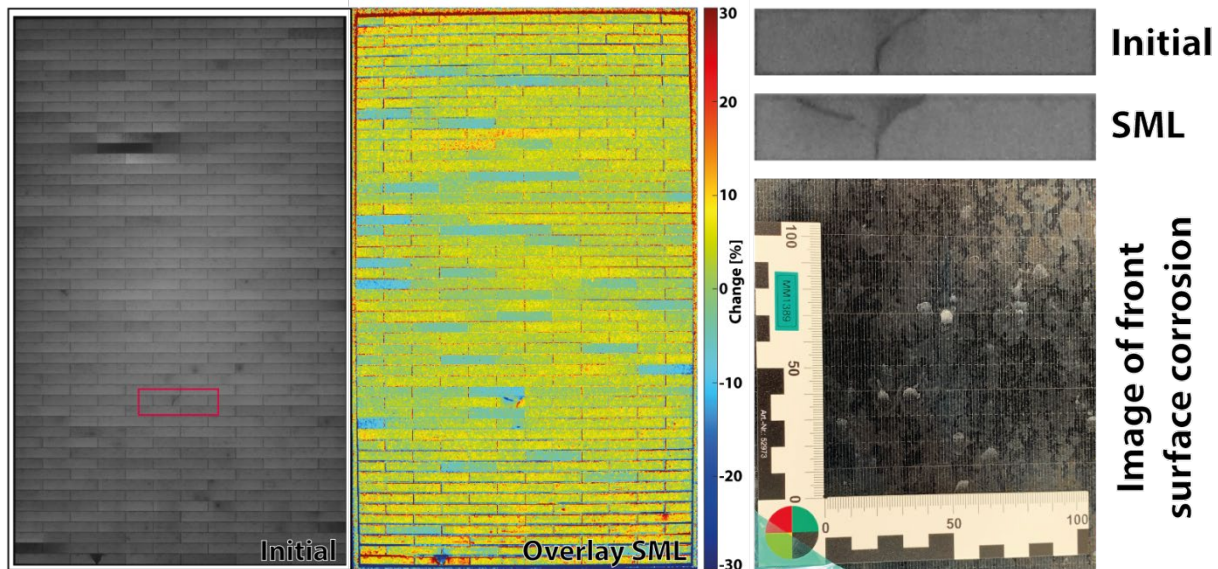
EL-pictures of Shingle-Matrix-Module M04 during testing sequence (left: initial, center: EL Overlay of initial and post SML, right: progression of seed-crack), right bottom: picture of surface corrosion after DH2000 on front glass
